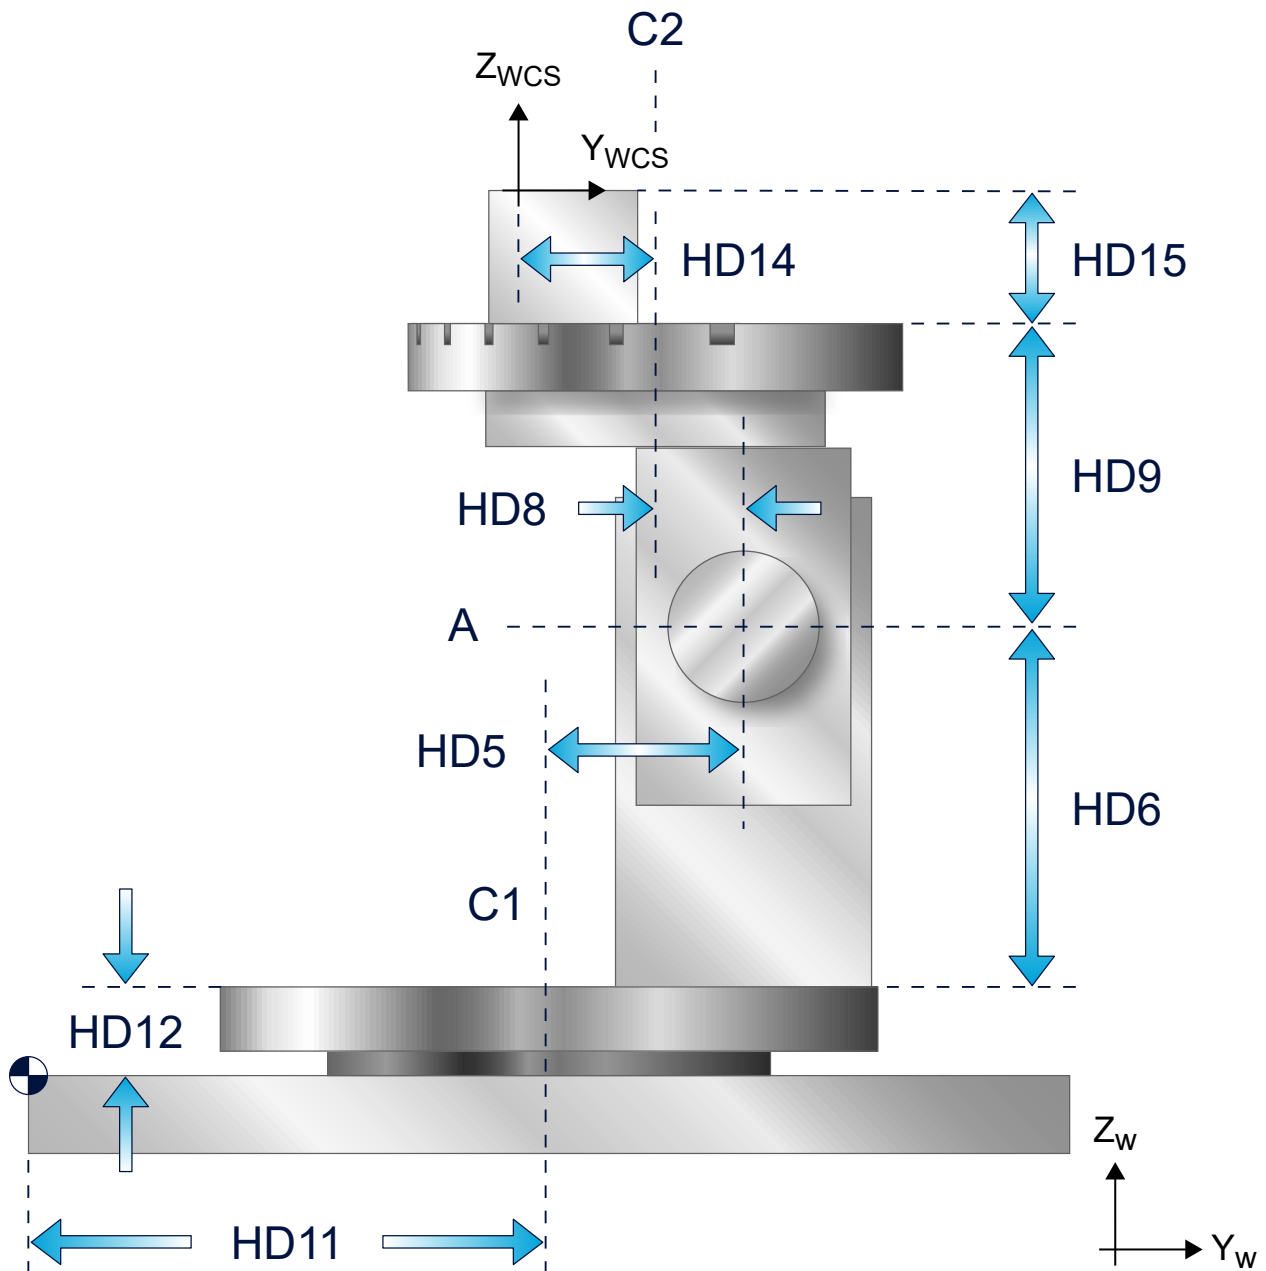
Parameters of CAC workpiece table in Y/Z representation
